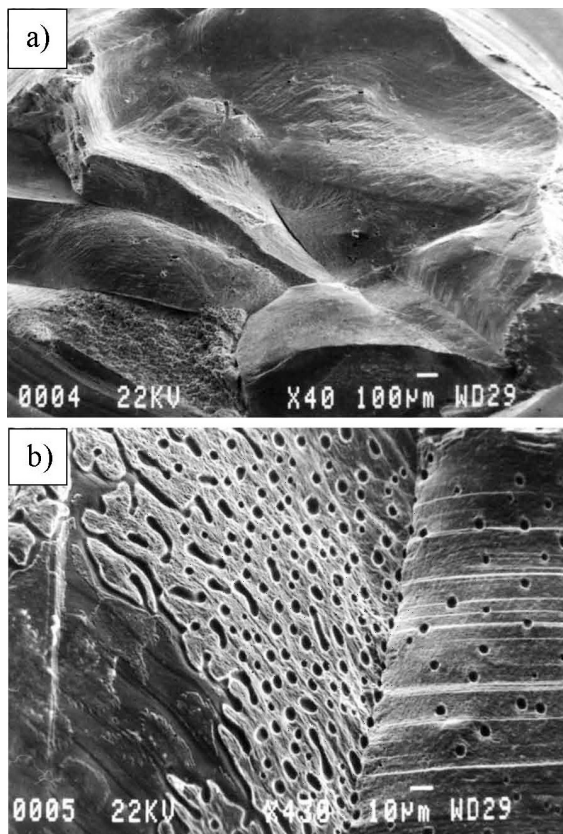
Fractography of industrial bronze CuSn6P analysed with the AES method after tensile tests at the temperature of 300 °C: a) intergranular brittle fracture, b) intergranular fracture with traces of plastic deformations of the surface
